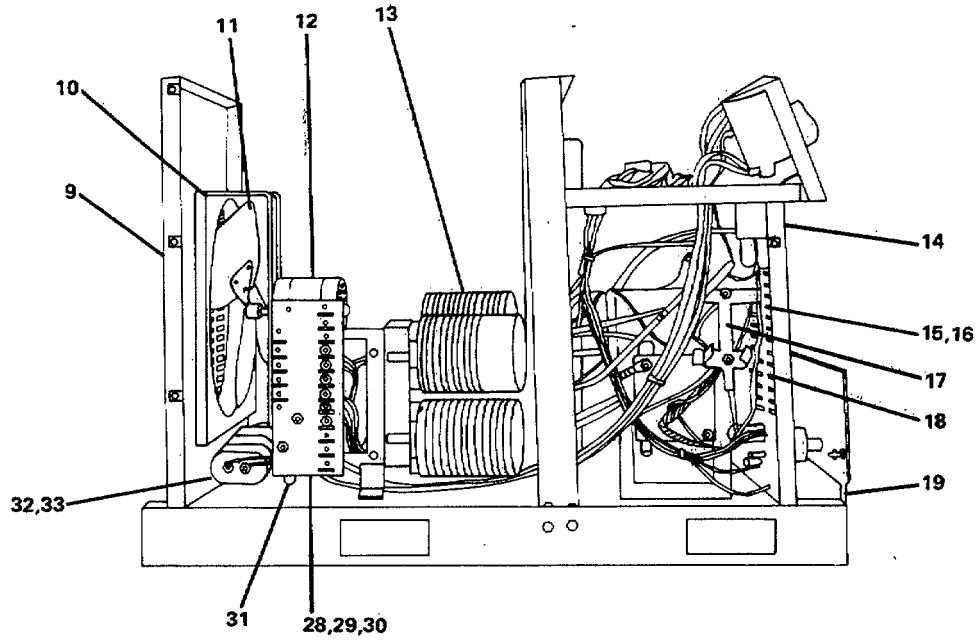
Repair Arc Welding Machine (Sheet 2 of 2).
